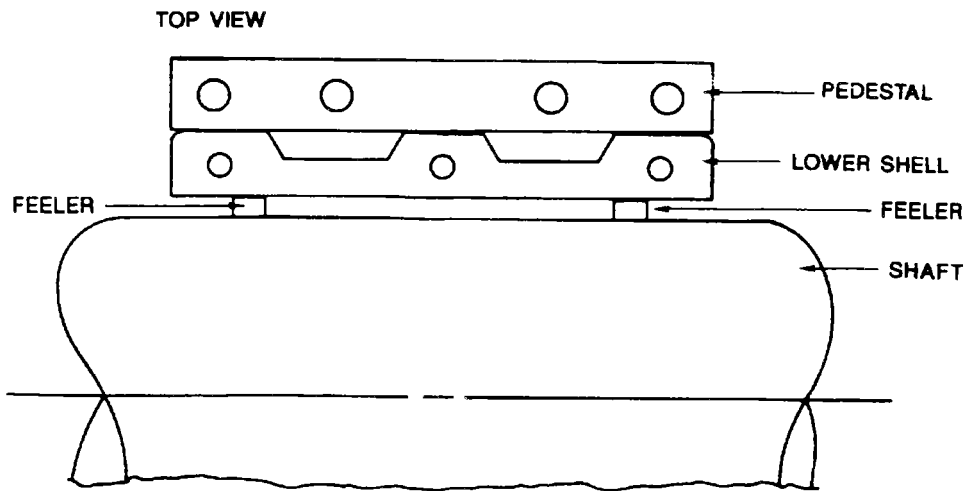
Disk-Oiled Bearing Feeler Positions
